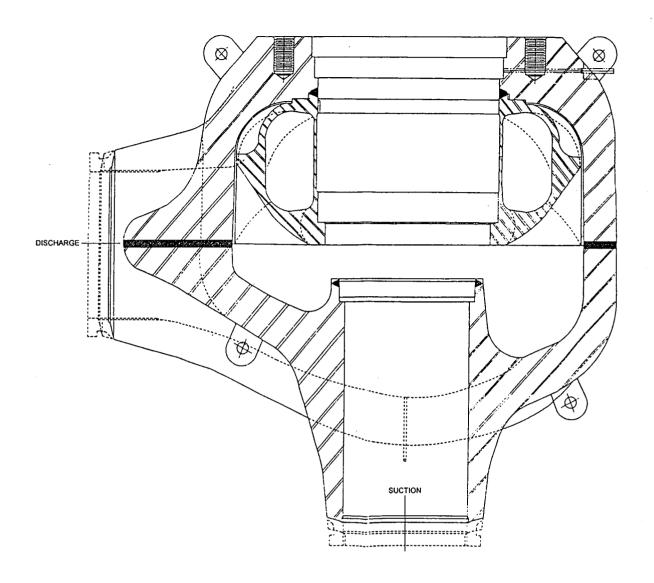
Oconee Unit 3 Reactor Coolant Pump Assembly
